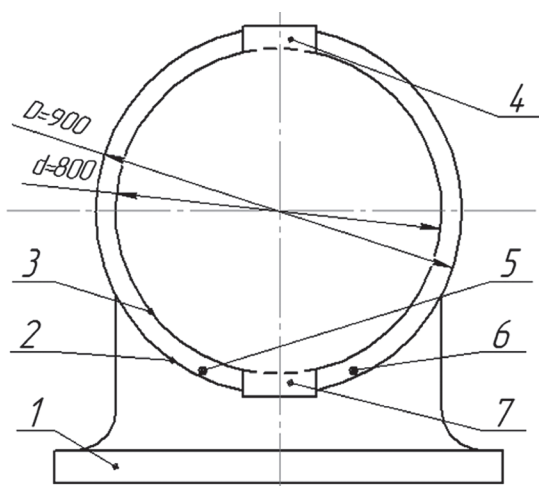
Installation for removing the zinc coating from galvanized steel scraps
